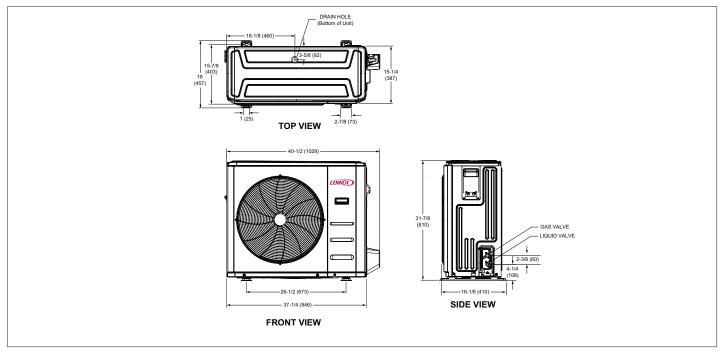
MLB024S4S Outdoor Unit Dimensions - Inches (mm)
